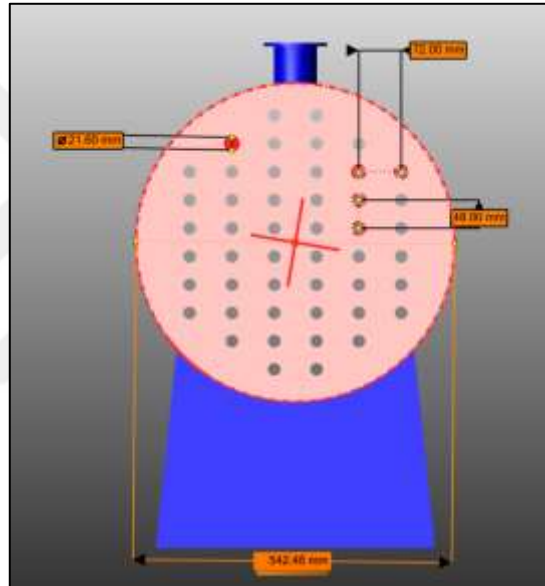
Shell and Tube Heat Exchanger Dimensions for Inner Tubes.
